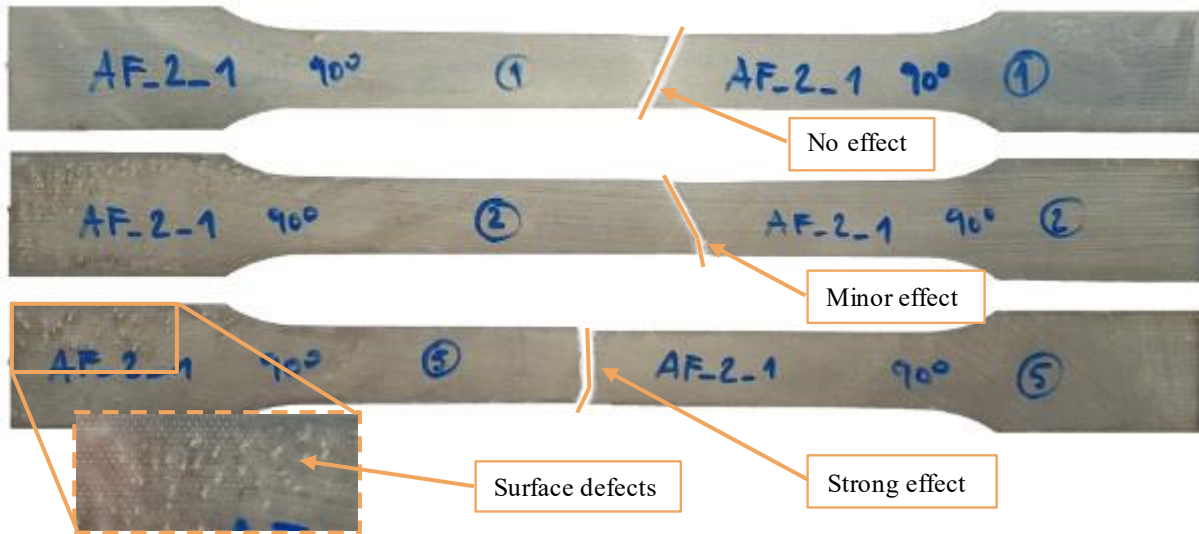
Effect of surface defects observed at tensile test samples after the wire eroding on the fracture pattern
